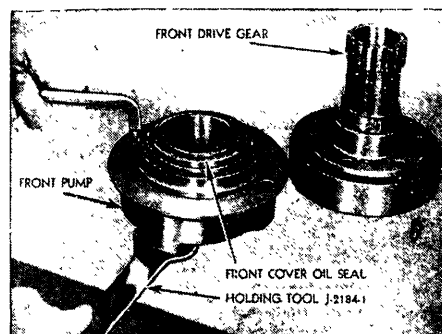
To disassemble front pump, separate pump from front drive gear. Hold pump with tool shown and remove screws from cover. Do not attempt to hold pump body by inserting bar into intake bearing pressure regulator piston bore as serious damage may result
